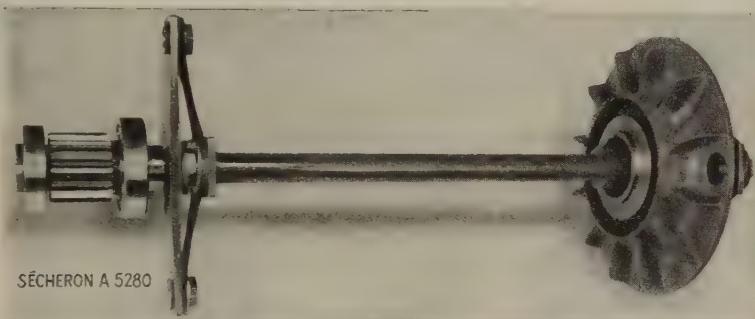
Cardan shaft of the motor coaches, figures 528 and 529. This combined part is exactly the same as figure 526 (see also figure 107a and b).
